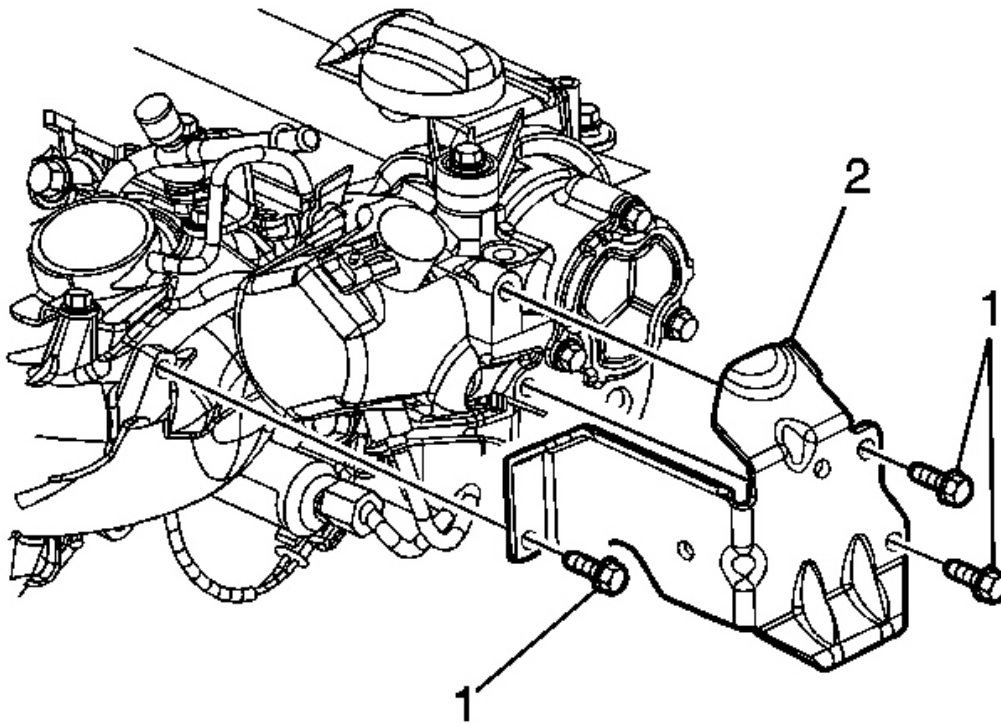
View Of High Pressure Fuel Pump Cover & Bolts
